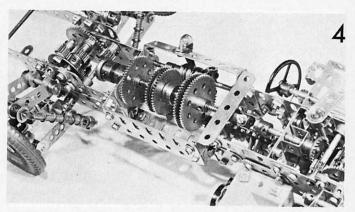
Underneath view of gearbox and transmission drives to identical front and rear differentials. Note clutch pedal lower lever.
